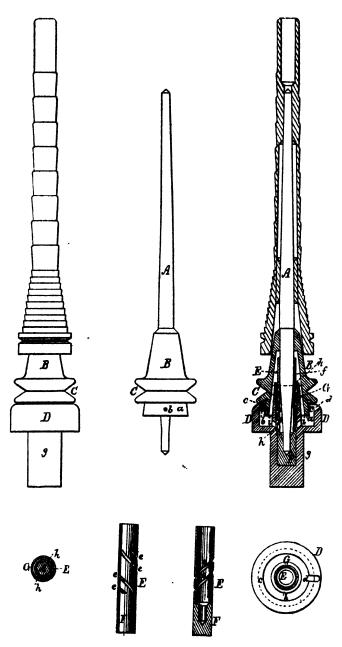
Birkenhead Spindle with an Elastic Bolster, 1878.
